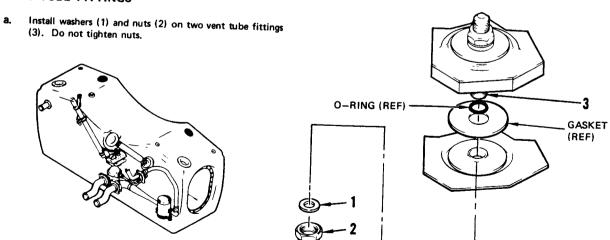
Installation; Main Sump Tank (Sheet 1 of 7)
